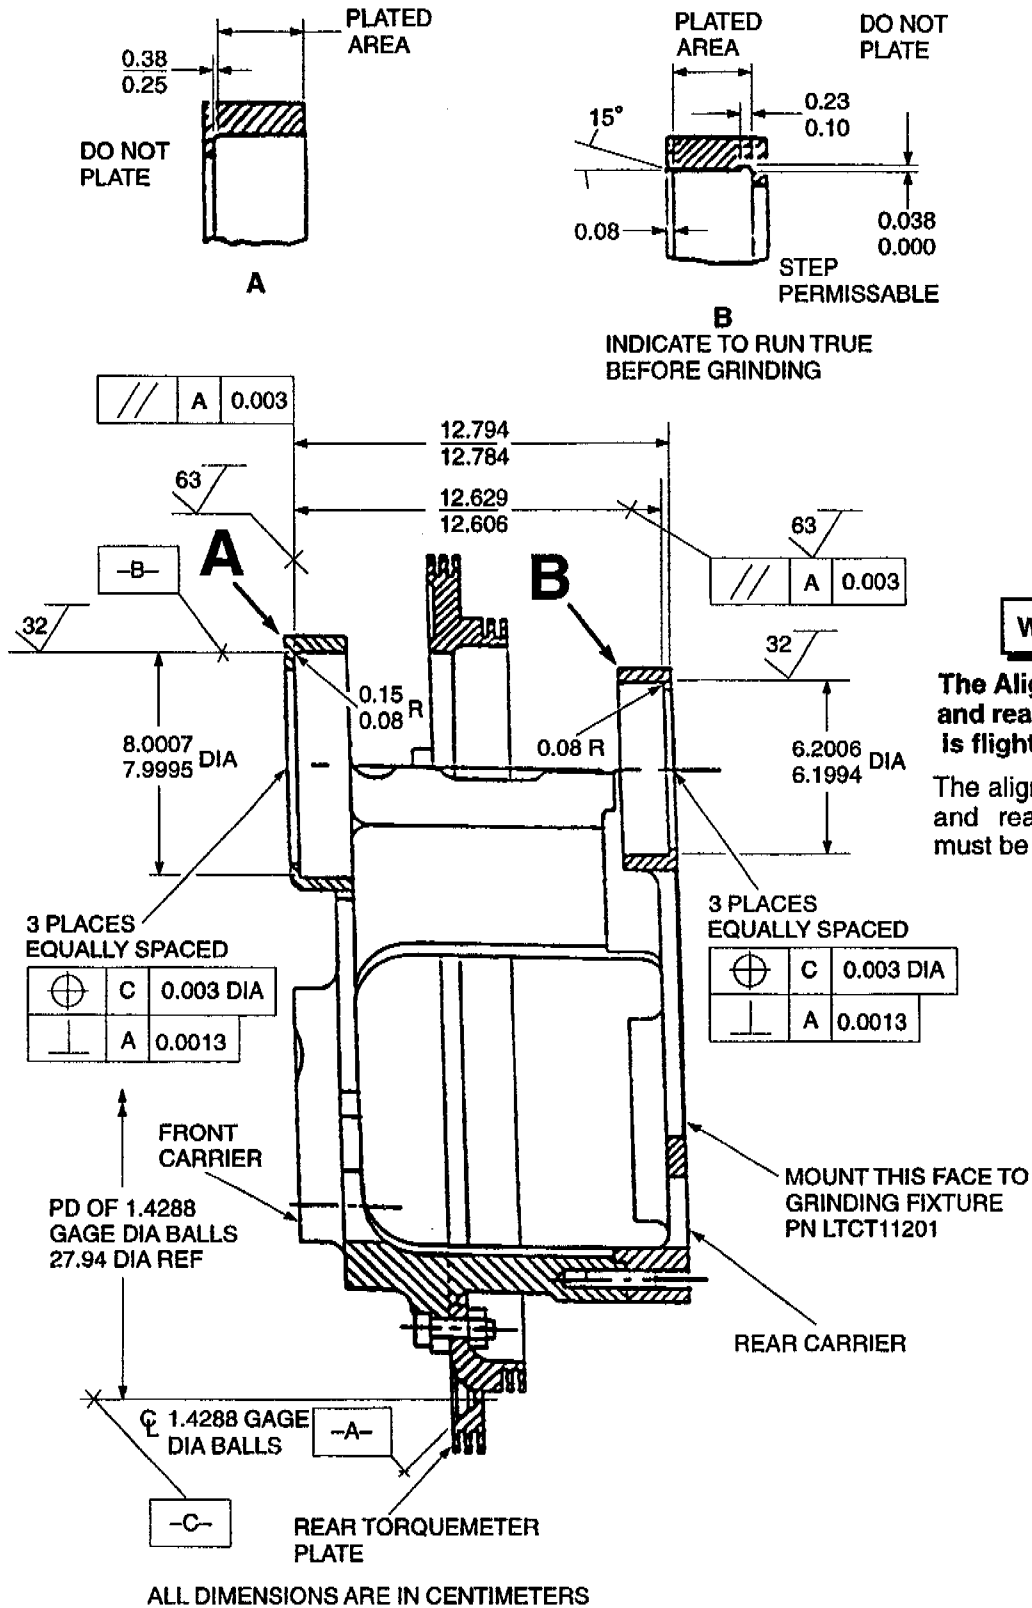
B. Carrier Assembly (1-030-340-05) - Plating Area (T53-L-13B, -703) (Metric).
